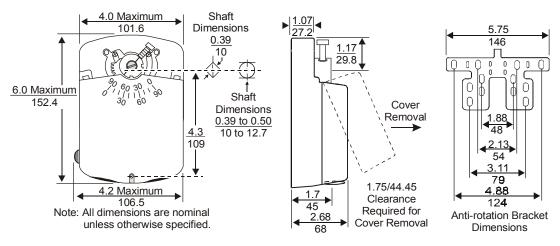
Actuator and Anti-rotation Bracket Dimensions, in. (mm)
